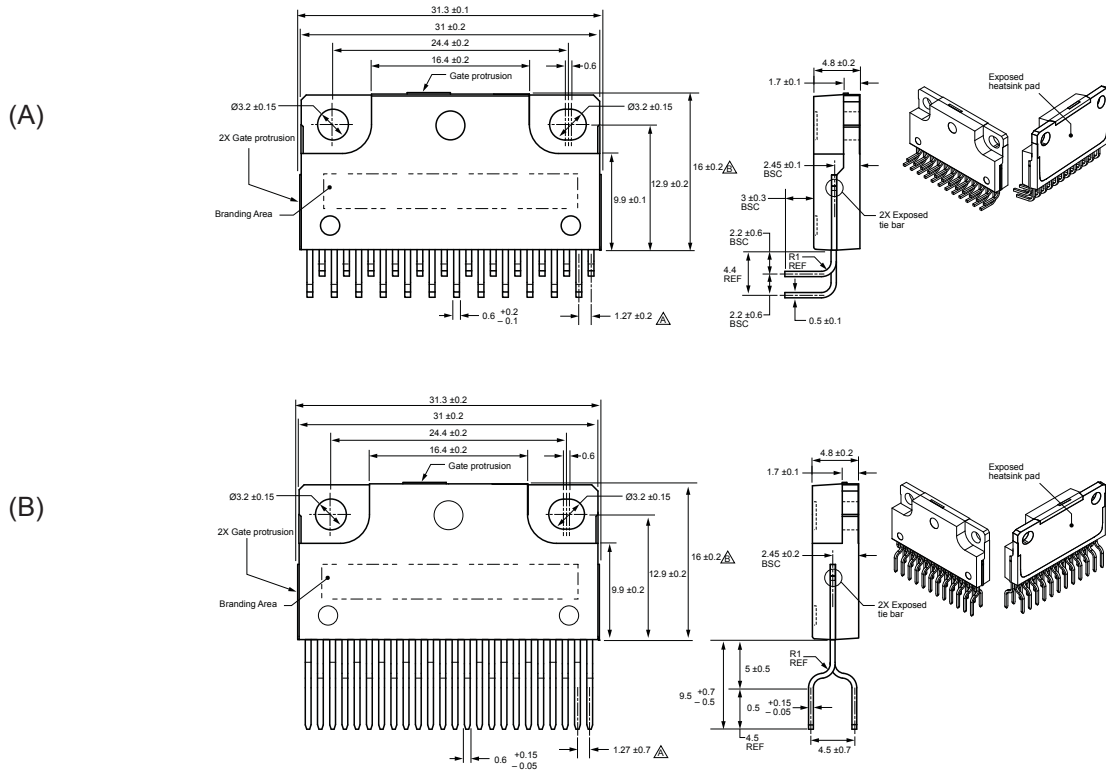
Package Outline Drawings. (A) LF2175, L-bend horizontal mount, (B) LF2171, vertical mount.
